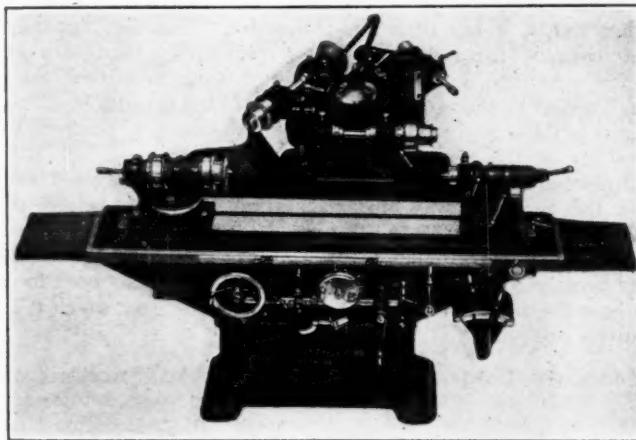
TURRET UNIVERSAL GRINDING MACHINE
